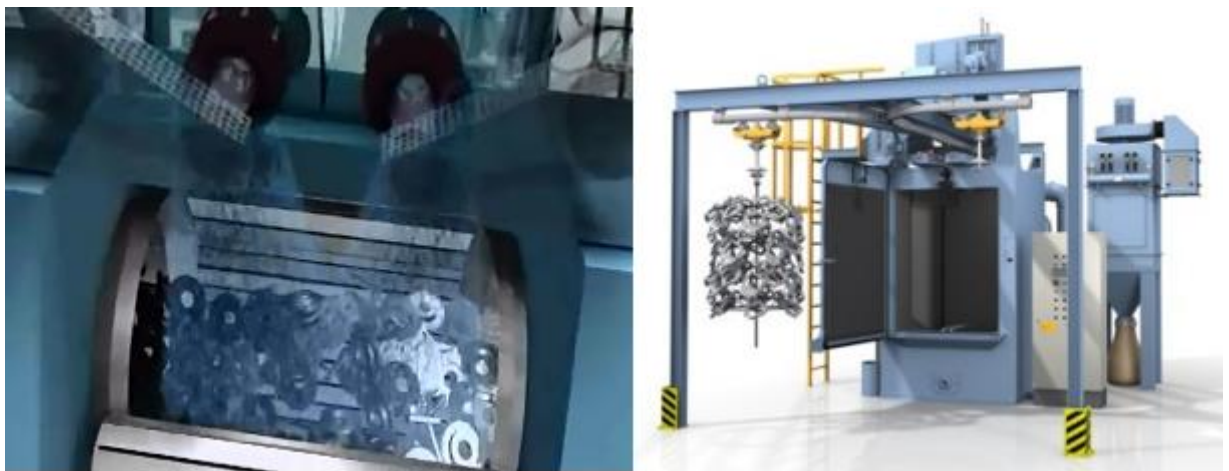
Shot blasting of brake disc castings in barrel type tumbling machine (Disa Group 2016) and rotating hanger-type machine (Wheel Laborator Group 2016).
